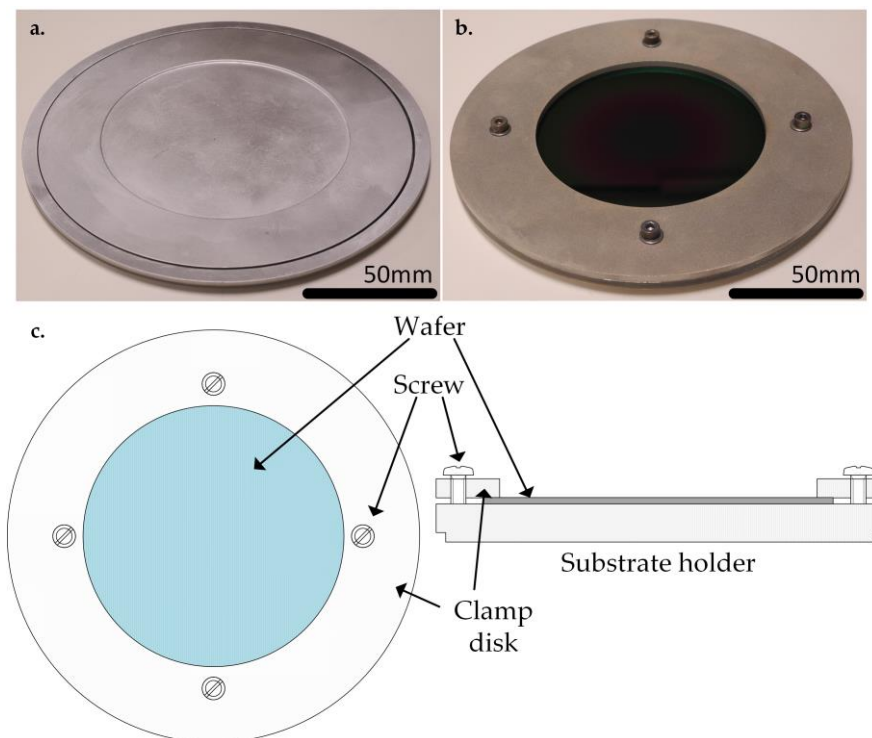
Standard sample holder (a) and tailored substrate holder (b). The sample holder for clamping the wafer consists of a base plate (Al), a clamping disk (Al) and fixing screws made of stainless steel (c).
